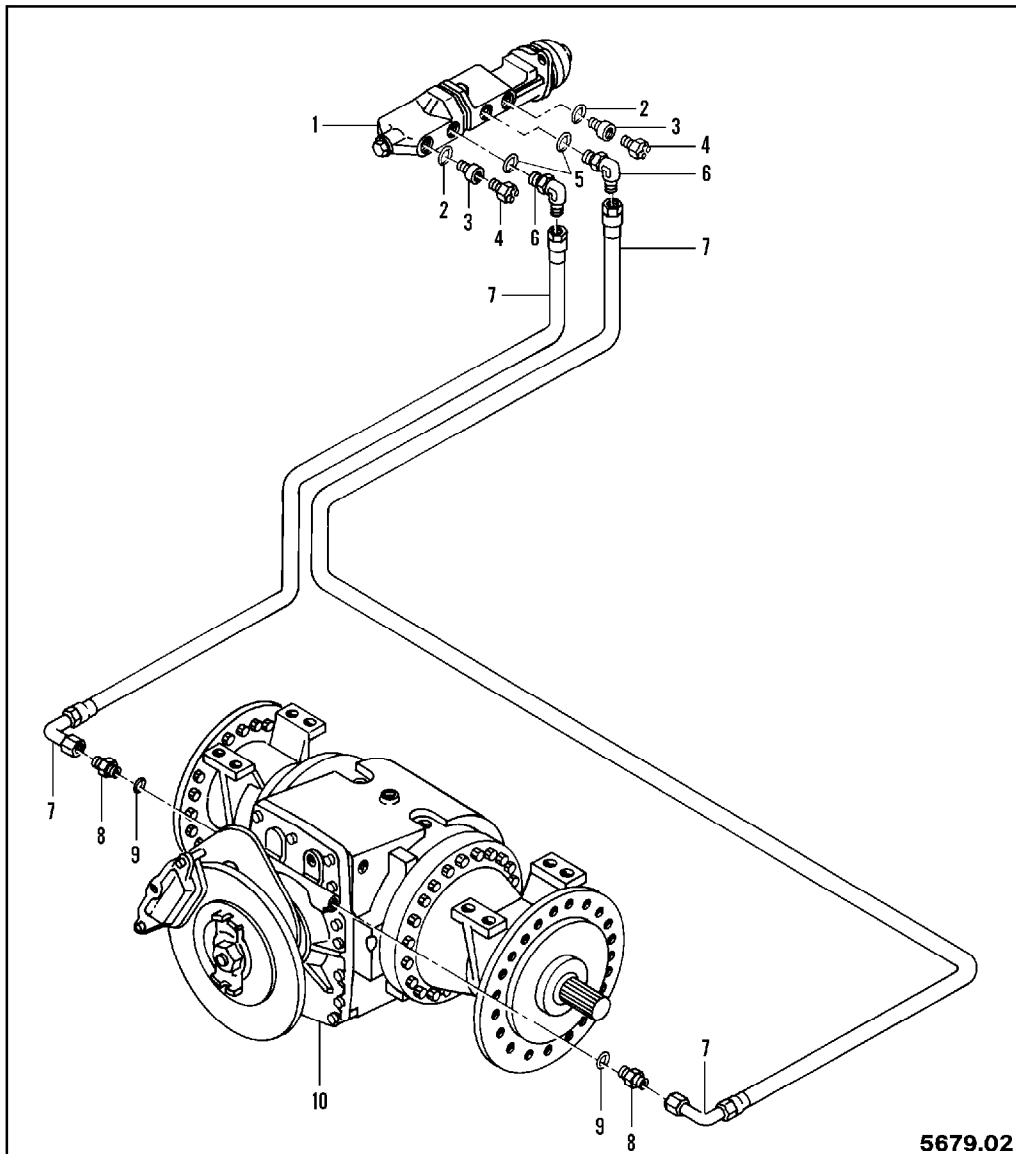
EXPLODED VIEW OF HYDRAULIC BRAKE LINES
